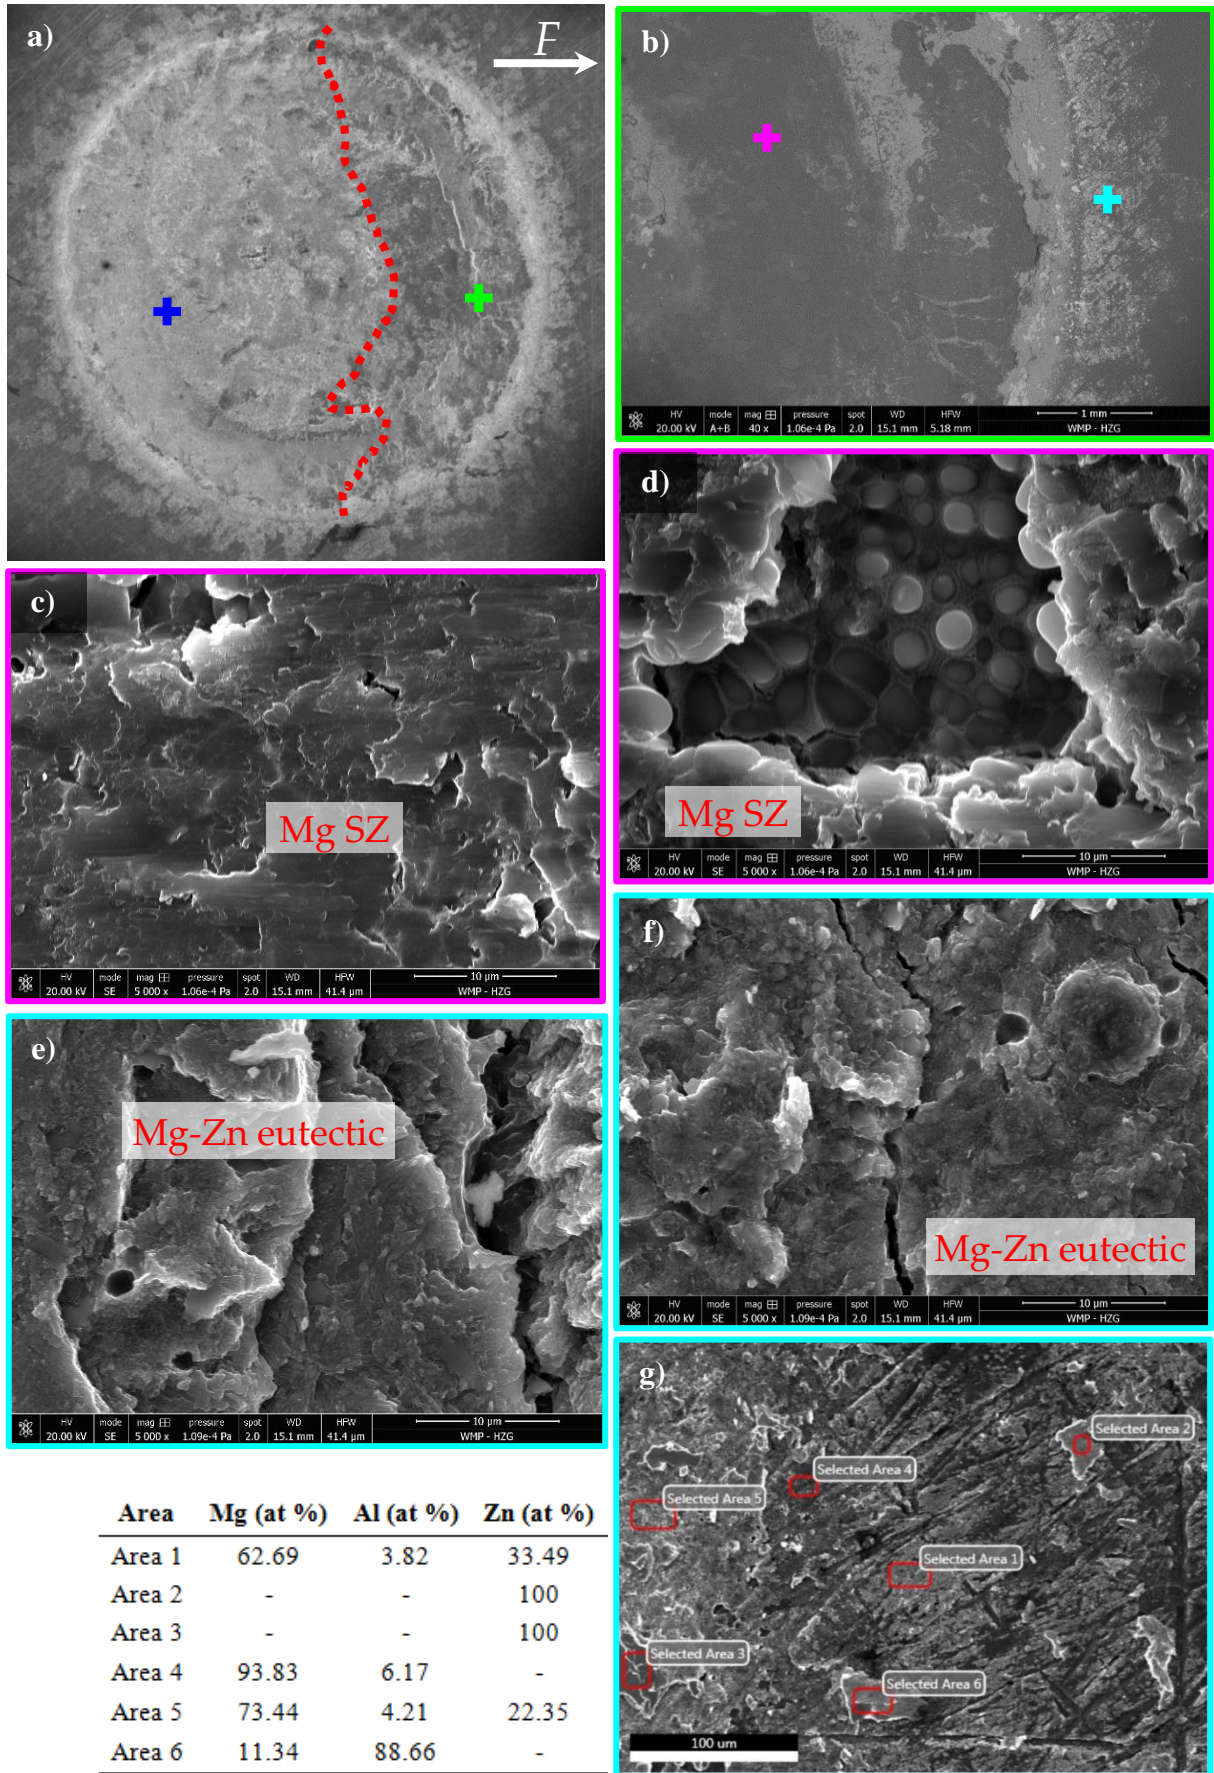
SEM fractographies of fracture surface from sample produced with low PD, backed with EDS analysis. a) Fracture surface overview of the Mg sheet bottom view. b) Detail of the right side of a). Higher magnifications of Mg SZ: c) and d); and Mg-Zn eutectic outer region: e) and f). g) EDS analysis of Mg-Zn eutectic.
